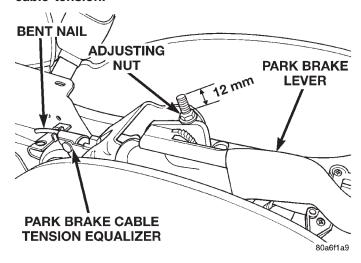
Parking Brake Adjustment (Rear Drum Brakes)
